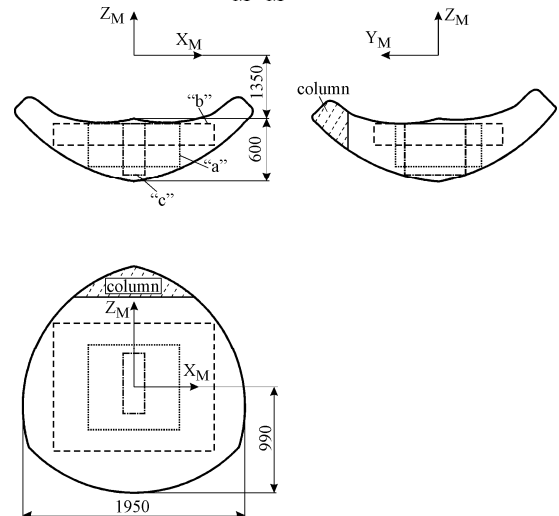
Workspace in the case of three-axis machining ($B = 0^\circ, C = 0^\circ$)
